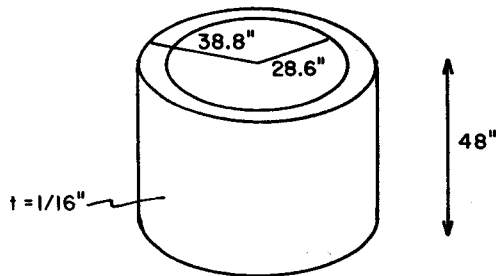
Dimensions of the nitrogen cooled aluminum shield for the K500 superconducting coil.
